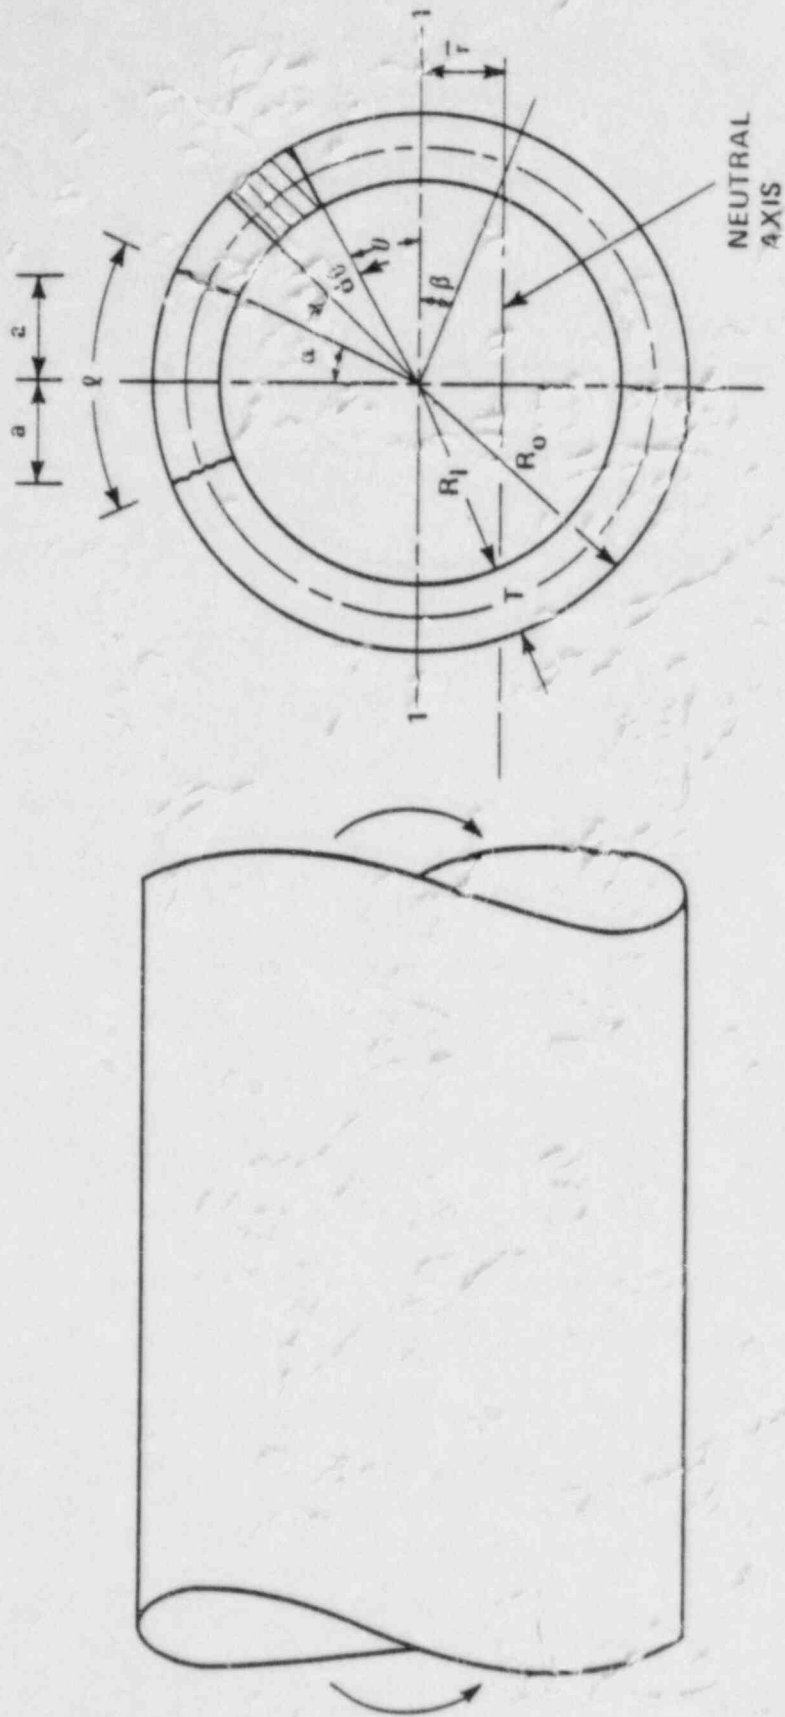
Pipe with a Through-Wall Crack in Bending
